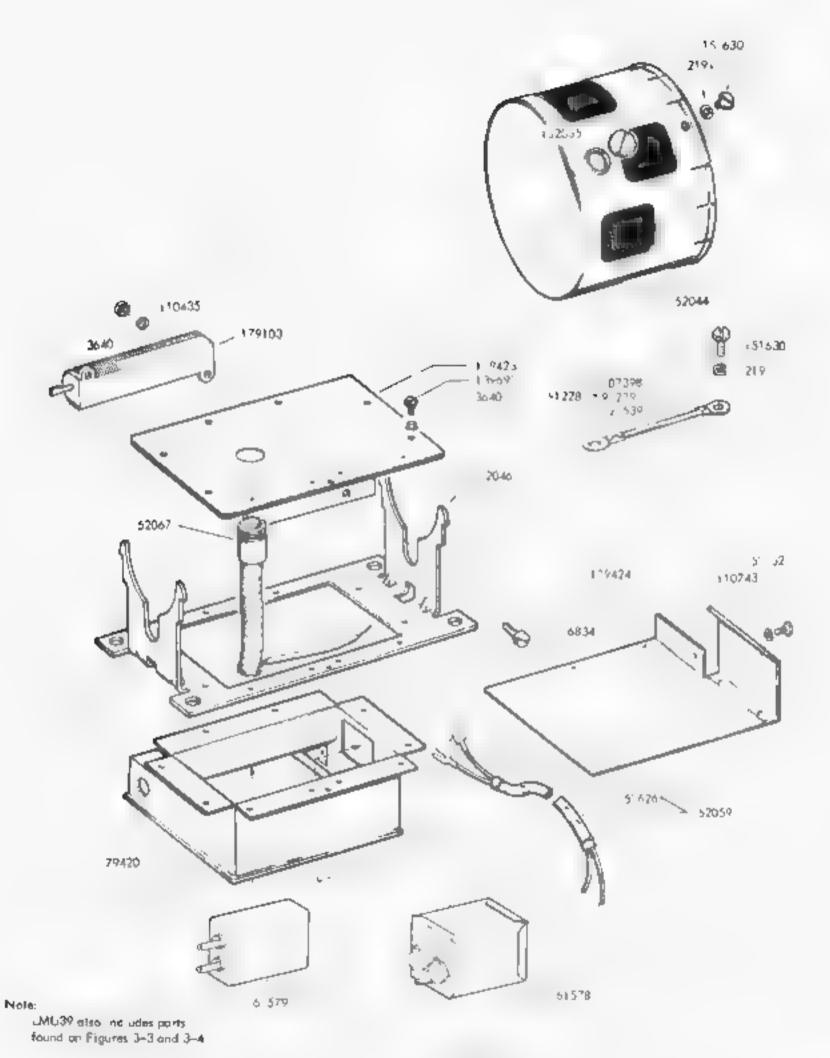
SERIES MOTOR UNIT MOUNTING PARTS (LMU39, 110V, AC)
